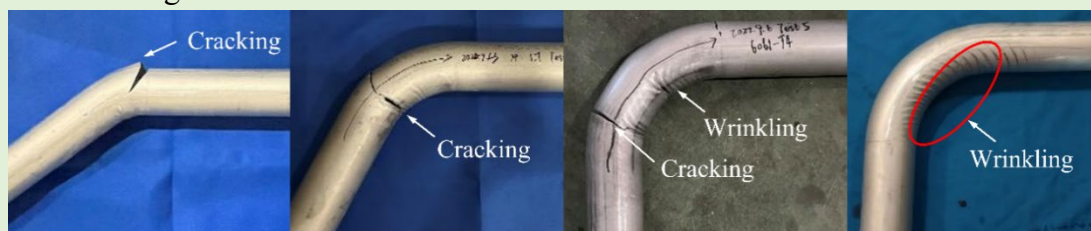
Bending defects of cracking and wrinkling of LDTW tubes.
